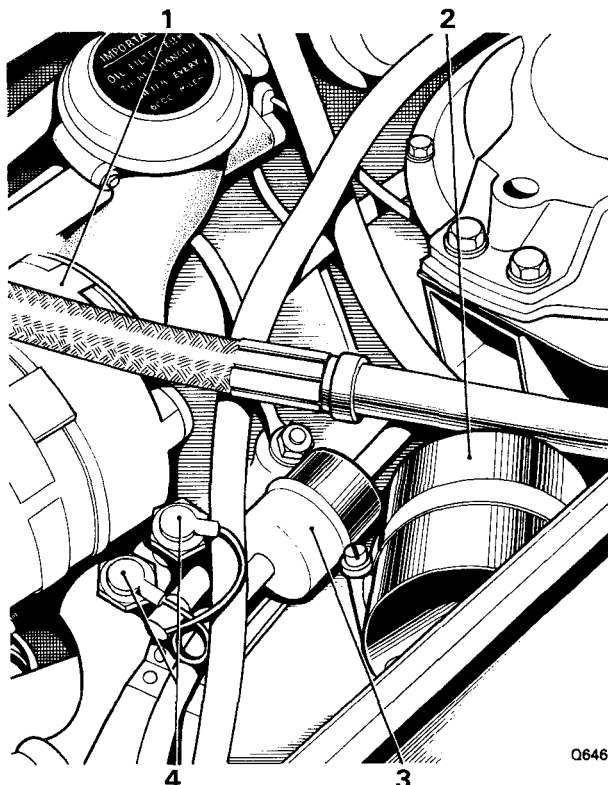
POSITION OF MIXTURE WEAKENING DEVICE FILTER AND PURGE LINE FILTER
